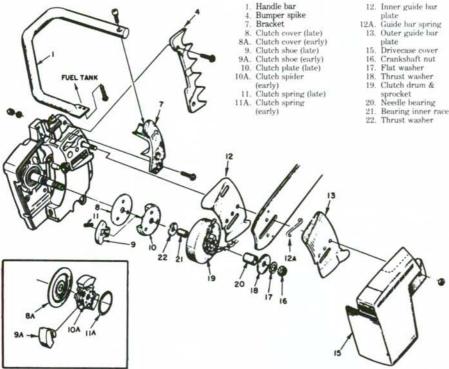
Exploded view of typical direct drive clutch assembly. Late type clutch assembly (items 8, 9, 10 & 11) is interchangeable as a unit with early production clutch shown in inset at lower left cor-
